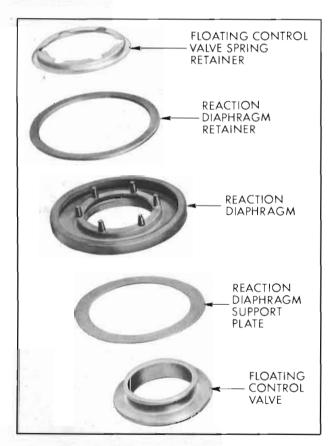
Floating Control Valve and Diaphragm Assembly
